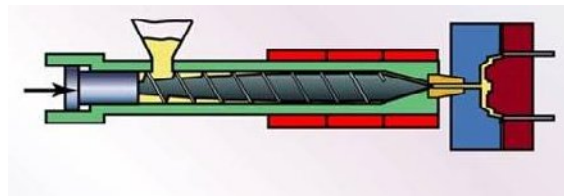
When the mold is ready, the screw is pushed forward by a hydraulic cylinder, filling the sprue bushing, sprue, and mold cavity with polymer. The screw begins rotating again to build up more polymer.
